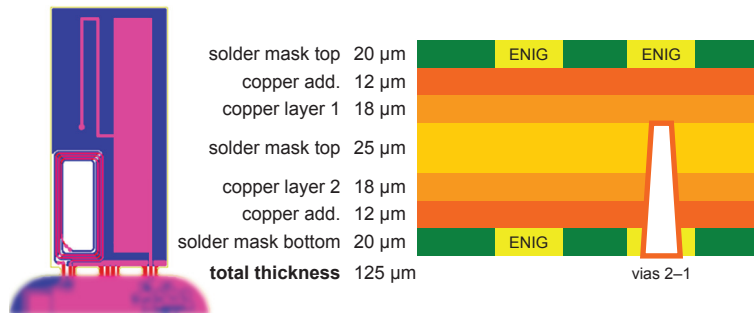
Reference antenna PCB layout and the initial stack-up.
